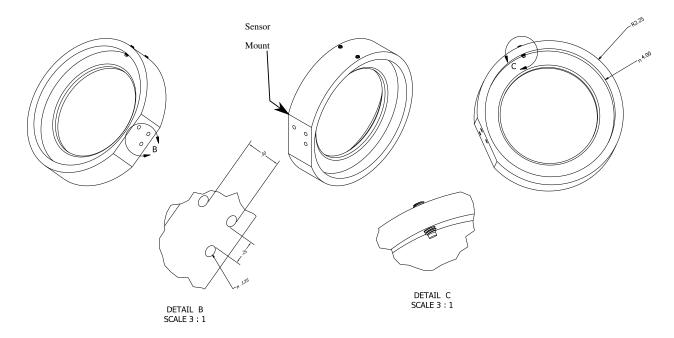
Standard dryer collar with sensor mount. Detail B shows the three sensor mounting holes, and Detail C shows the set screw mechanism.
